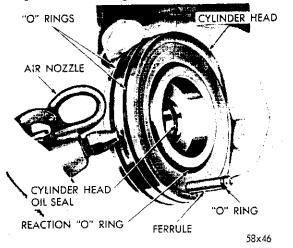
Removing the Reaction Ring Seal from the Cylinder Head
